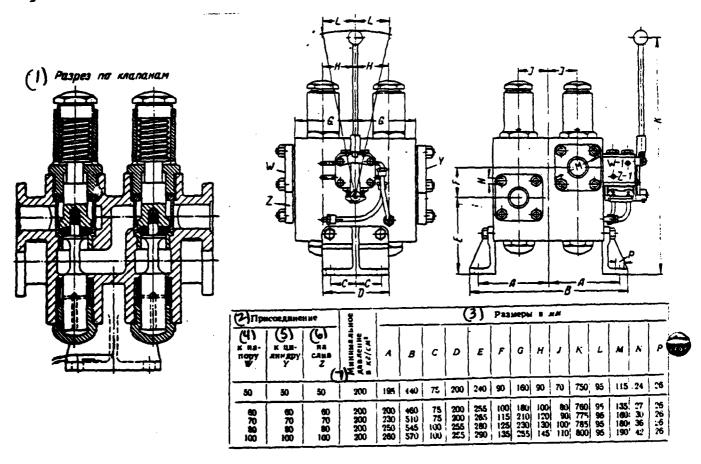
Exemplary/approximate construction/design and the sizes/dimensions of four-valve distributors.
